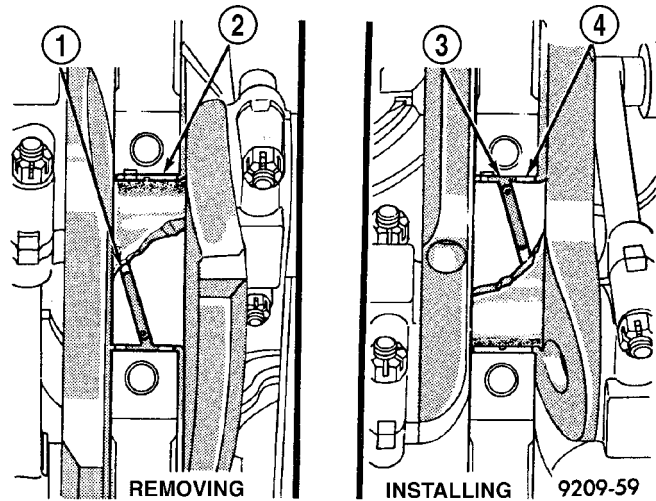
Upper Main Bearing Removing/Installing With Special Tool C-3059
